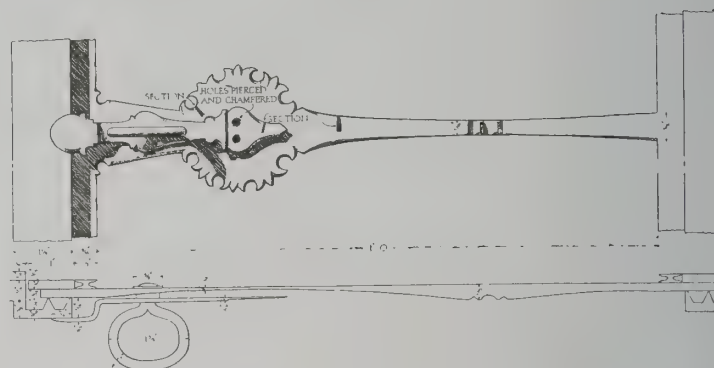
A DRAWING OF THE FITTING ILLUSTRATED BELOW.
